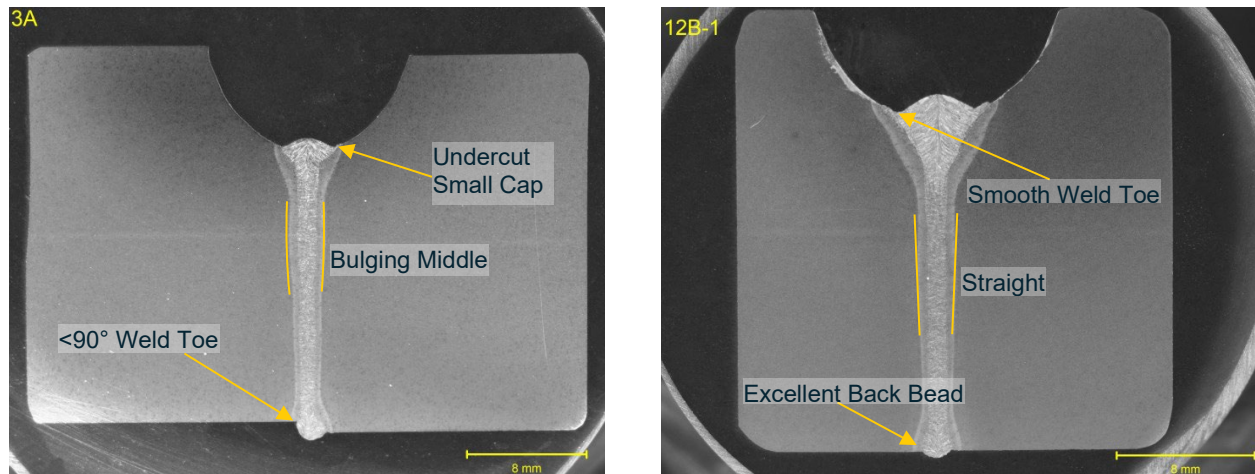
Bead On Plate Trials to Approximate HLAW Parameters
